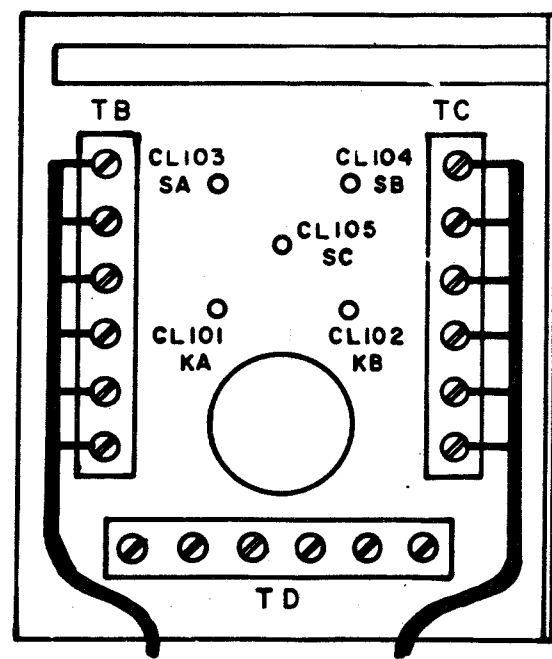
323815 Electrical Service Assembly (Signal) Wiring Diagram (Sheet 1 of 5) 5-179/5-180 blank
